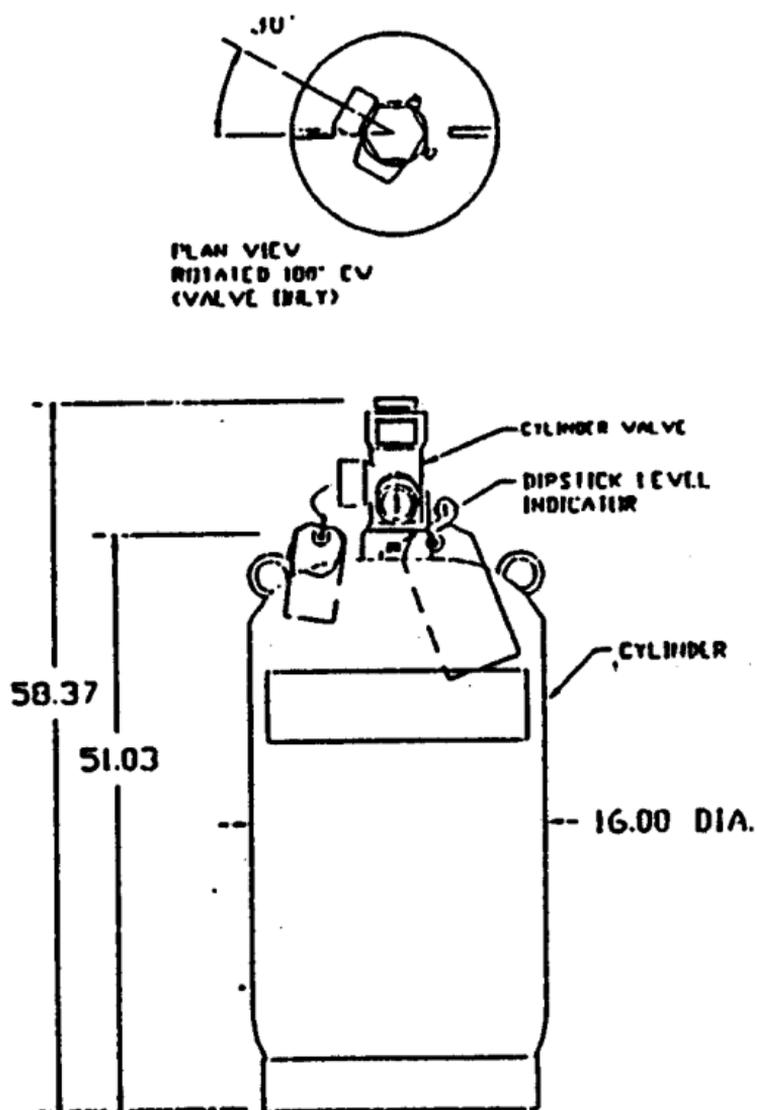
Halon 1301 Cylinder/Valve Assembly, 200 lb., Horizontal Mounting
